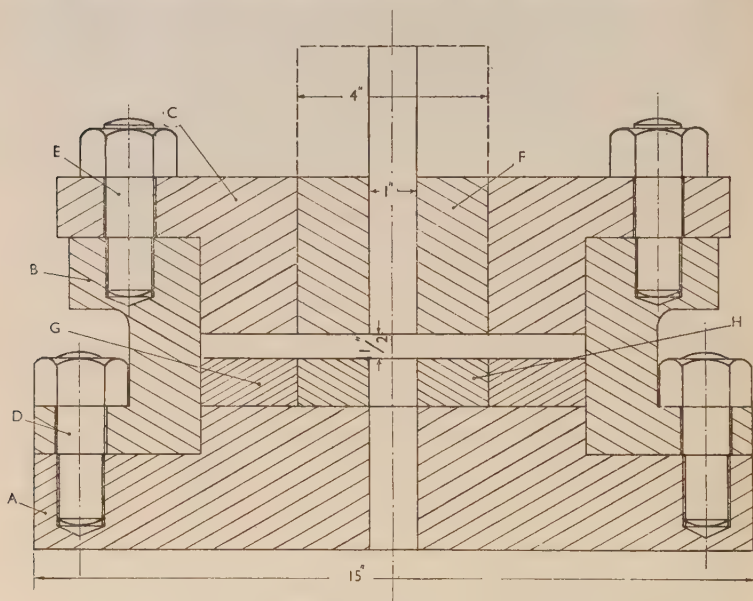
Apparatus for Blanking $\frac{1}{2}$ -in.-Thick Specimens.
